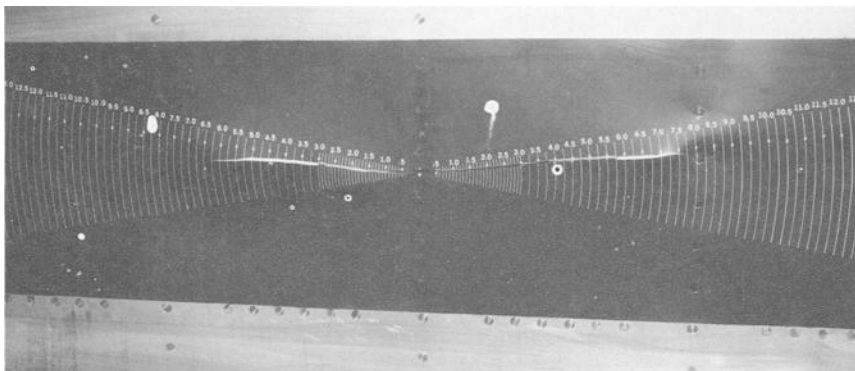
Arrest of crack after fast fracture at gross stress of 39,931 psi, panel 11, test 2.
